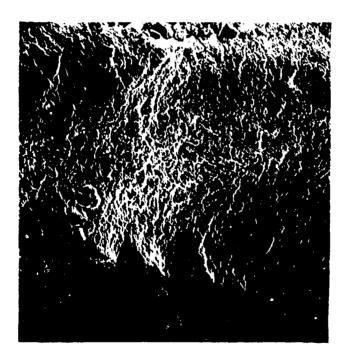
Secondary origin of fatigue failure of a temper-embrittled A-514 weldment 70x.
